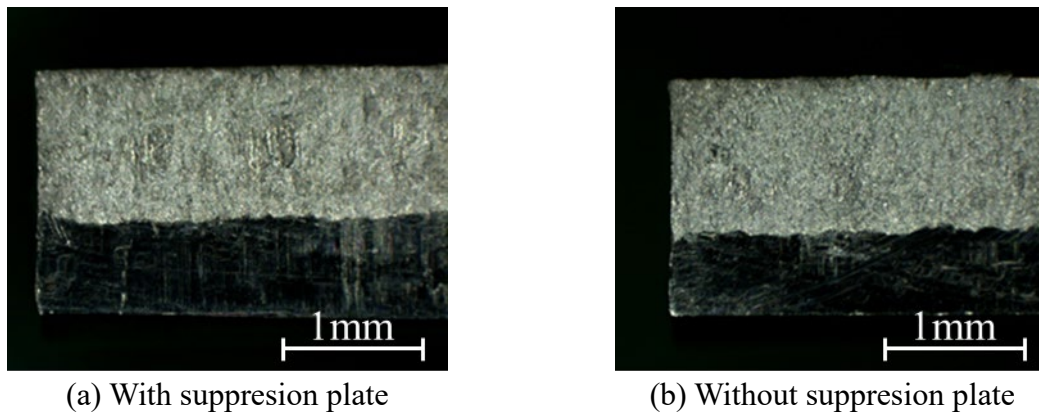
Cut surface of the sheet material under the punch obtained by shearing for $L_t=4$ mm.
